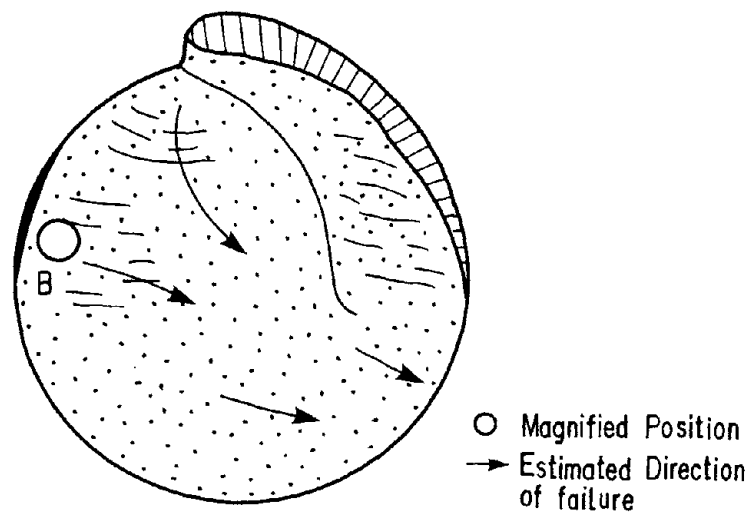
Direction of Failure of Bolts (Hatsune Bridge)
